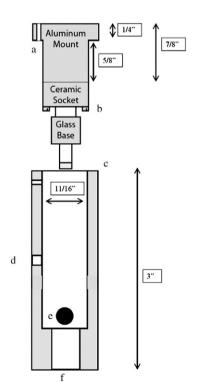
Illustration of ETV cell. a) tapped hole for riser screw b) 2 screws to attach socket to mount c) 1" aluminum rod with 11/16" inner diameter to fit ceramic socket d) 1/8" hole centered and in line of sight of coil e) 1/16" NPT for gas fitting in back near bottom f) ¼" NPT for glass outer joint fitting.
